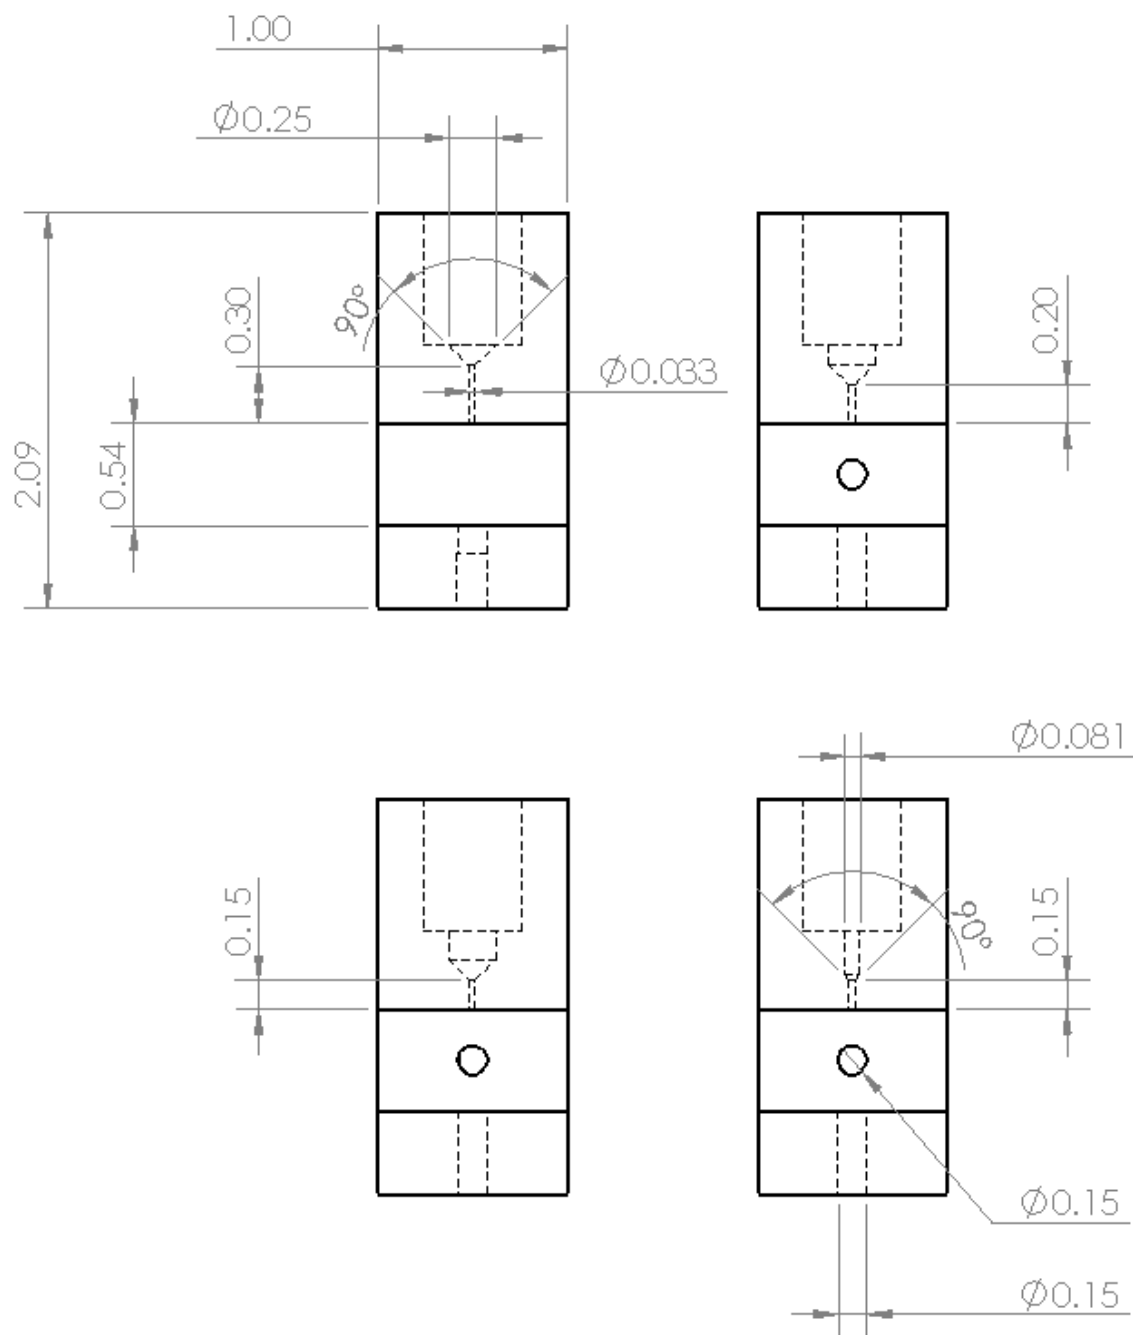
Drawings of injector modules showing major dimensions in inches. All injector orifices have a diameter of 0.033in (0.84mm).
